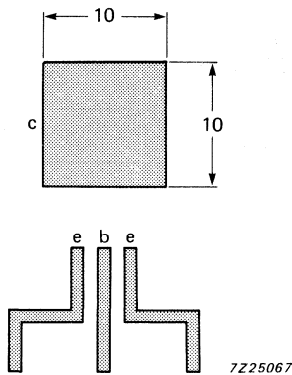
Single-sided 35 μm Cu-clad epoxy fibreglass printed circuit board; thickness 1.5 mm; tracks fully tin plated; Cu area shown shaded. (Dimensions in mm).
